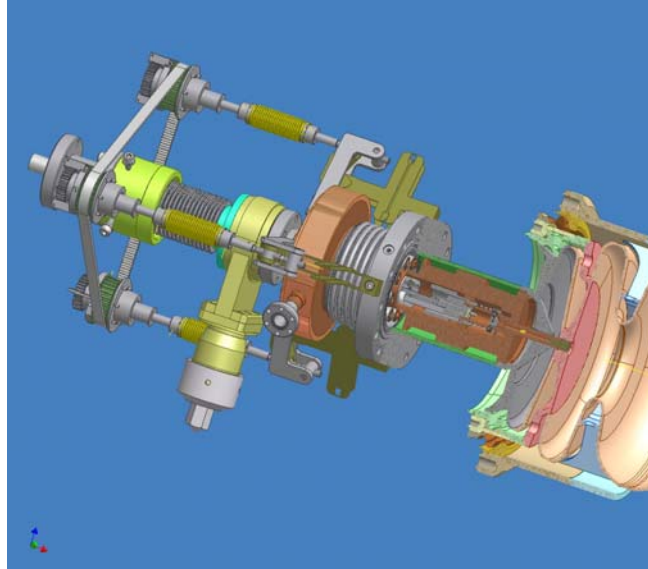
Design of the cathode cooling system with motor-driven alignment. The wheels with the gear belt are outside the vacuum vessel.
